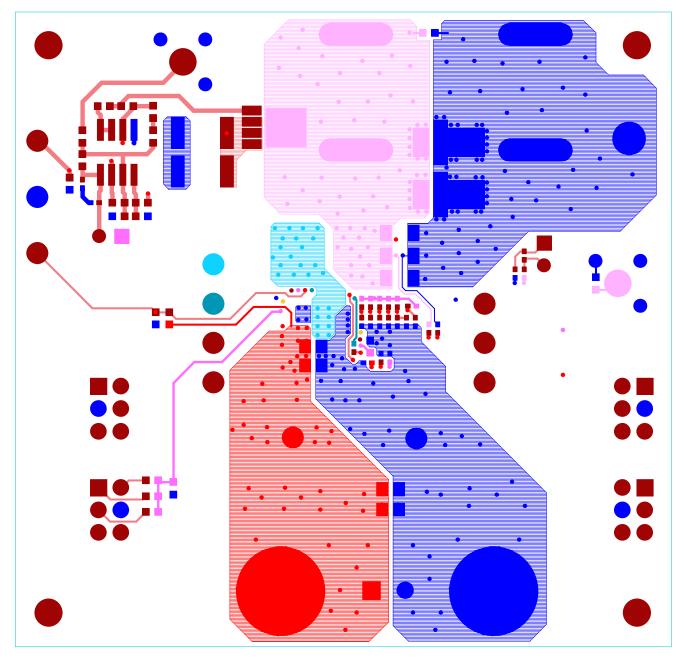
PCB - BOTTOM LAYER (TOP VIEW)
